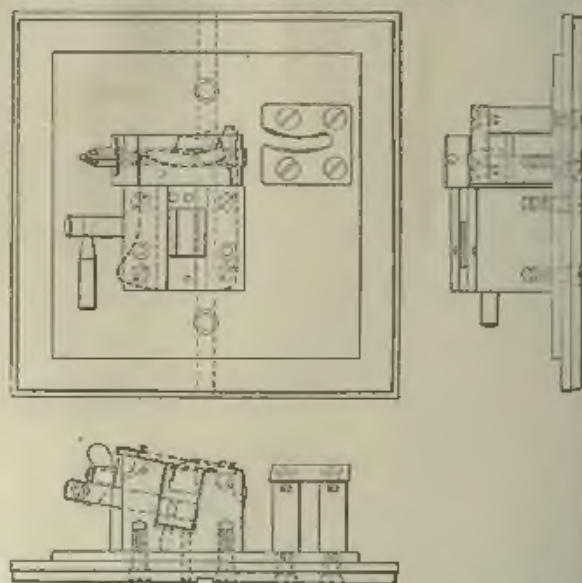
PROFILING FIXTURE FOR CLEARANCE SLOT
